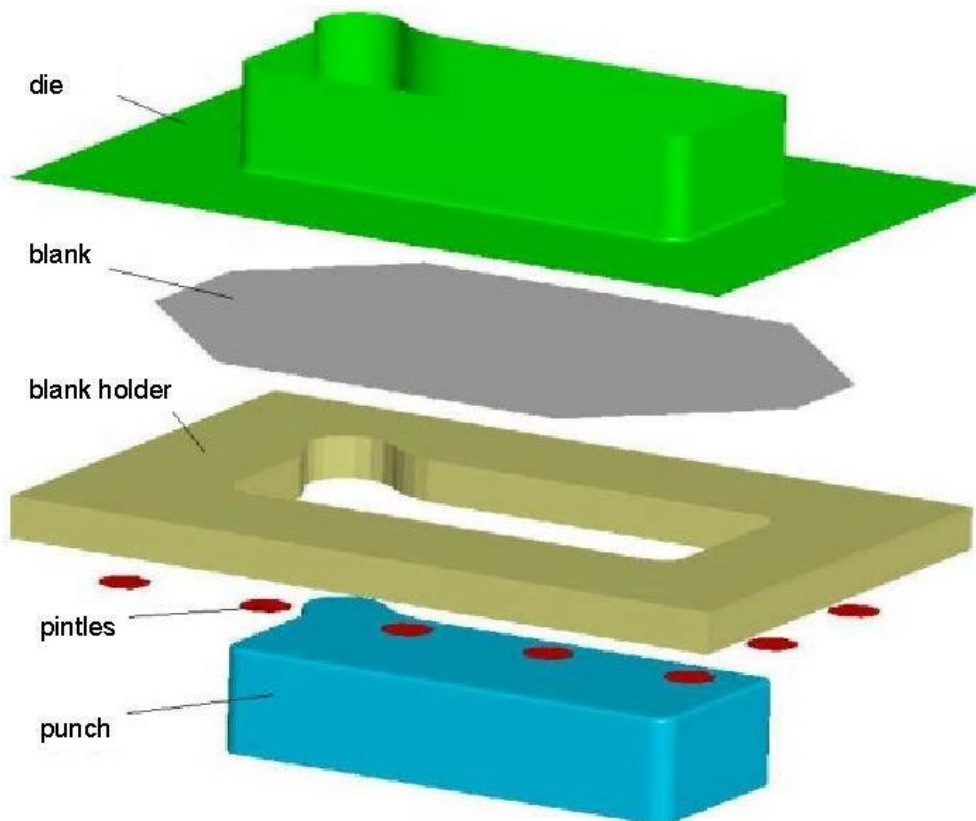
Represent the Usage of Blank Holder during Deep Draw [34]
